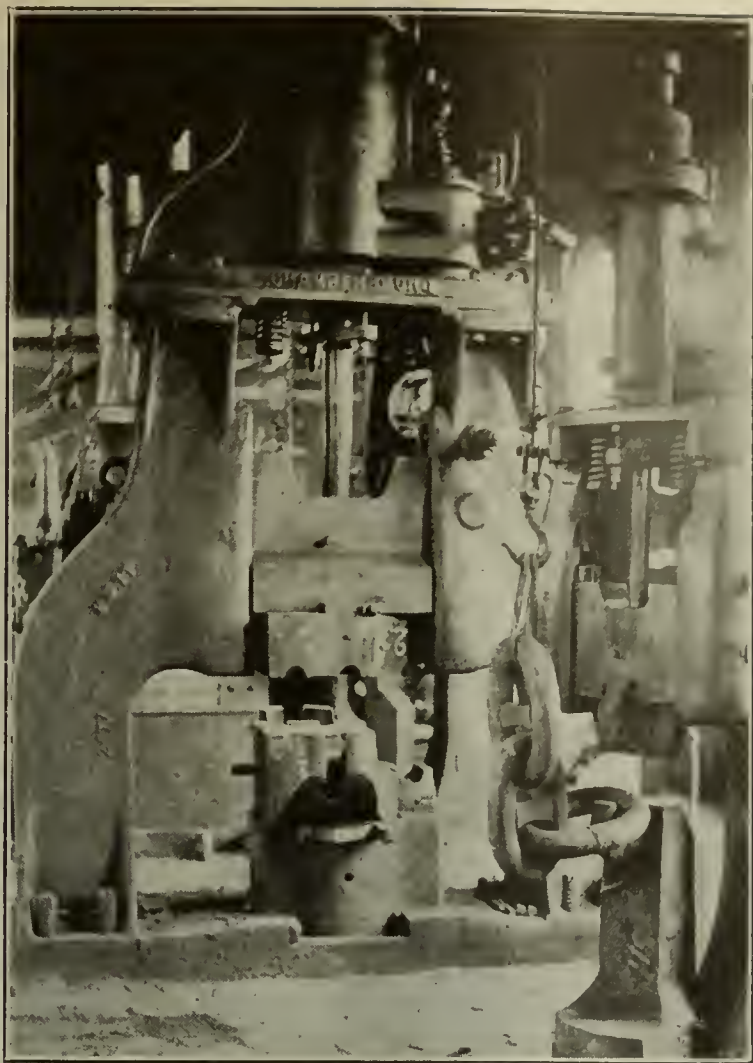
WELDING HEAVY WROUGHT-IRON CHAIN IN DOLLY DIES AT THE BOSTON NAVY YARD
